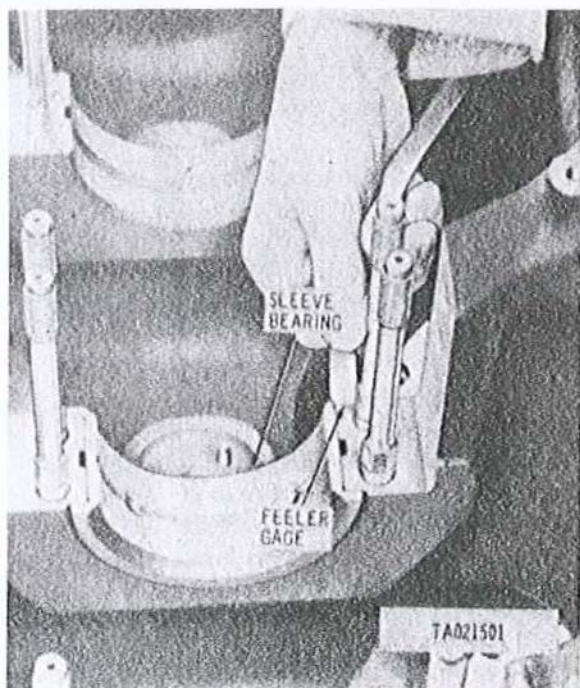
Checking clearance between upper main thrust bearing flange and crankcase.
